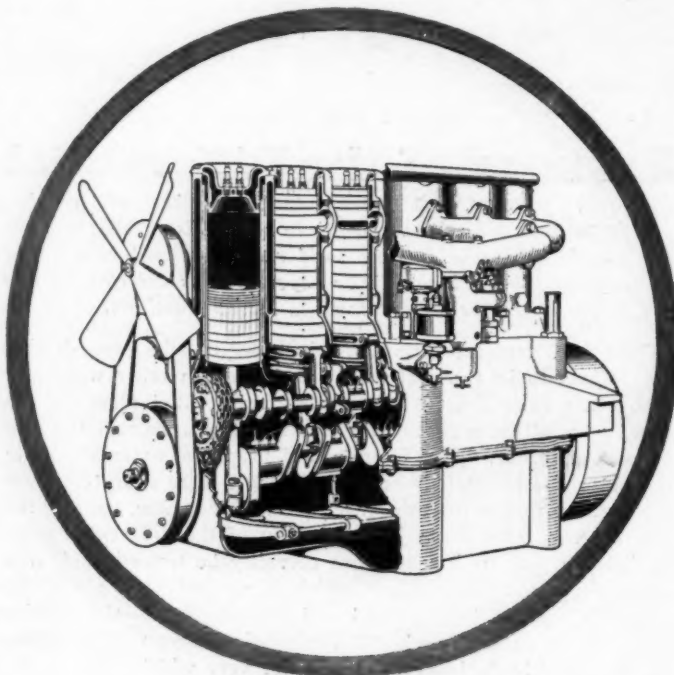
Part sectional view of the Stoddard-Dayton six-cylinder Knight motor
